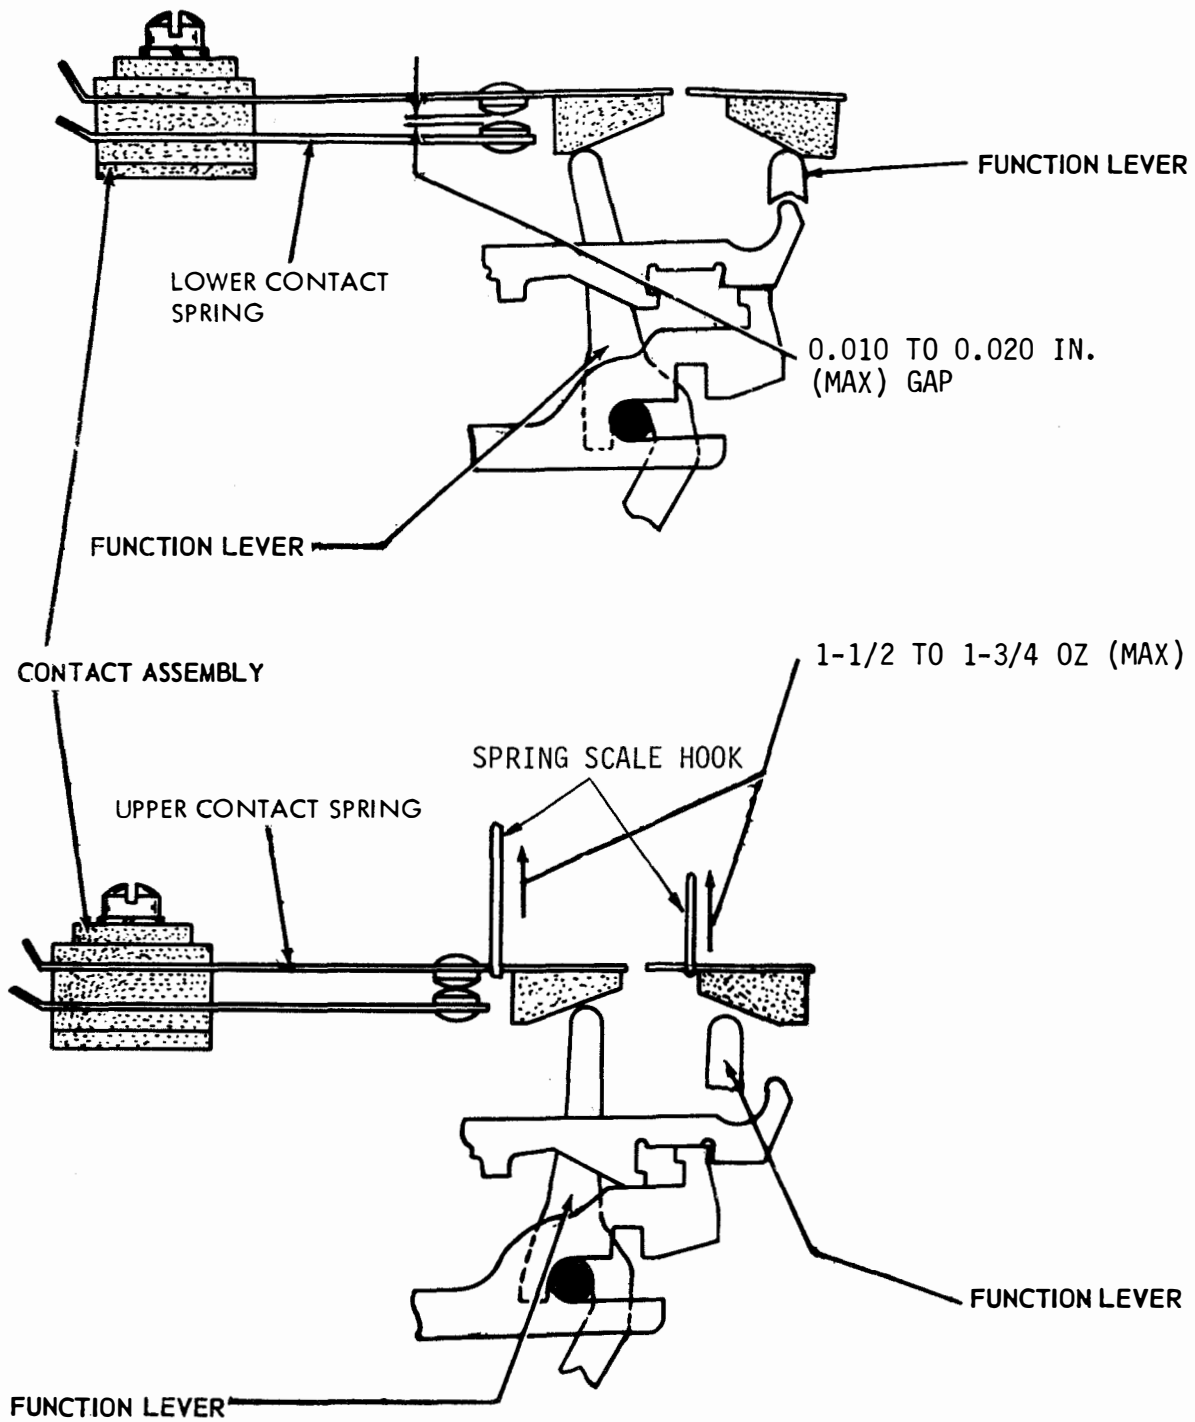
Bell or Motor Stop Function Contact, Right Side View
